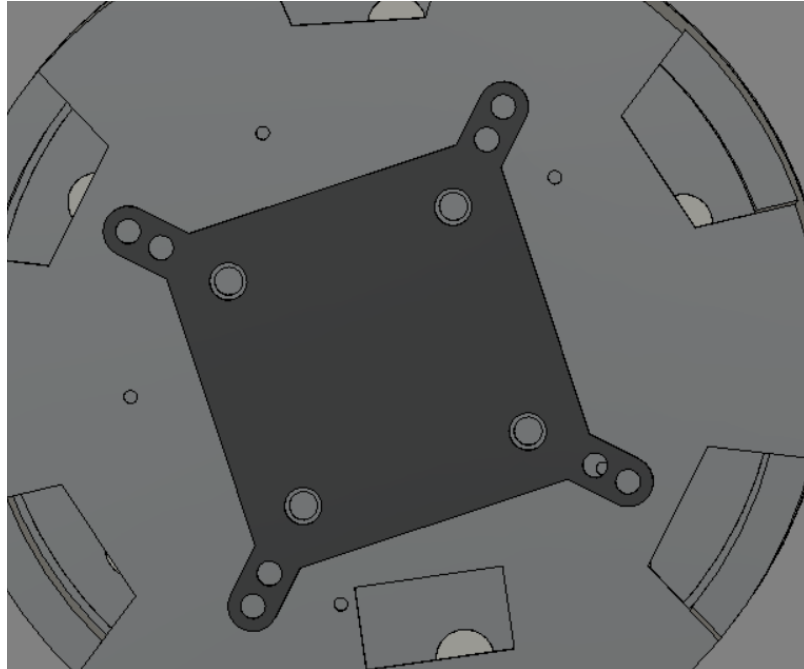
CAD Model of Encoder Mounted to back of Motor Sheath
